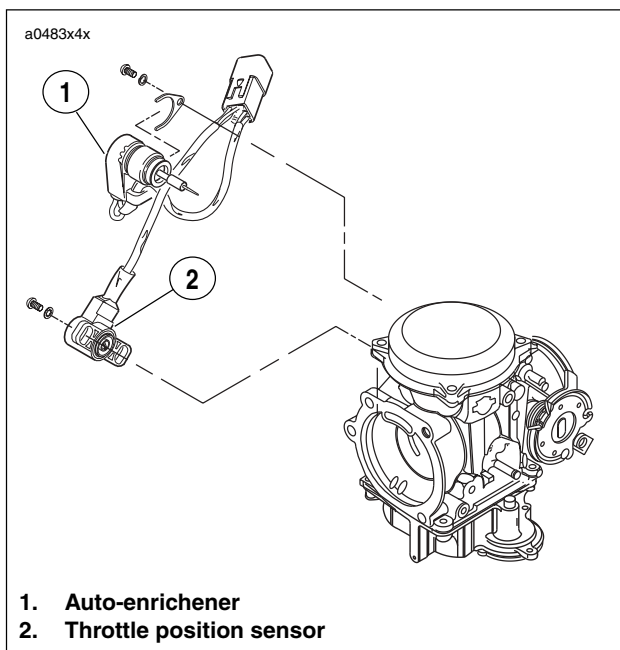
Location of Auto-Enrichener and Throttle Position Sensor
